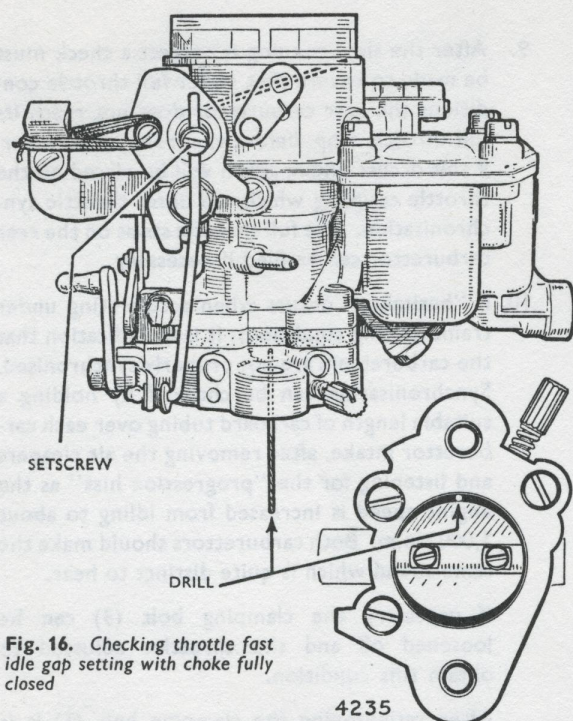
Checking throttle fast idle gap setting with choke fully closed
